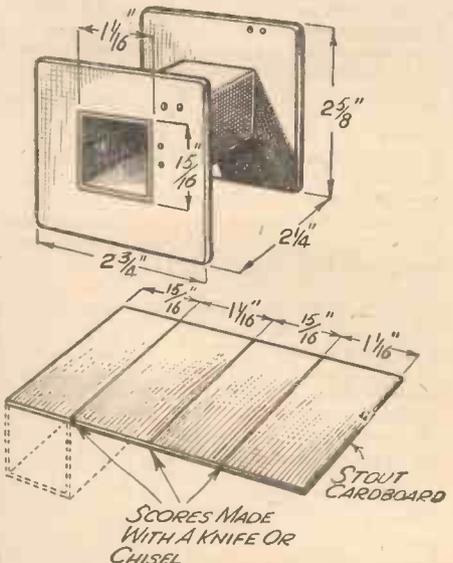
Details of the transformer winding spool are given in these sketches.
